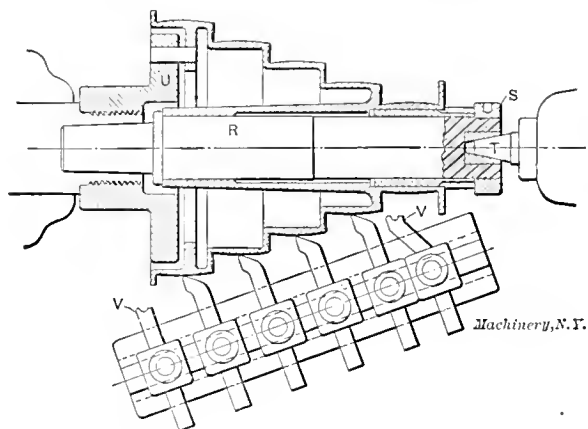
Method of Driving Head Cones, and Layout of Tools.
